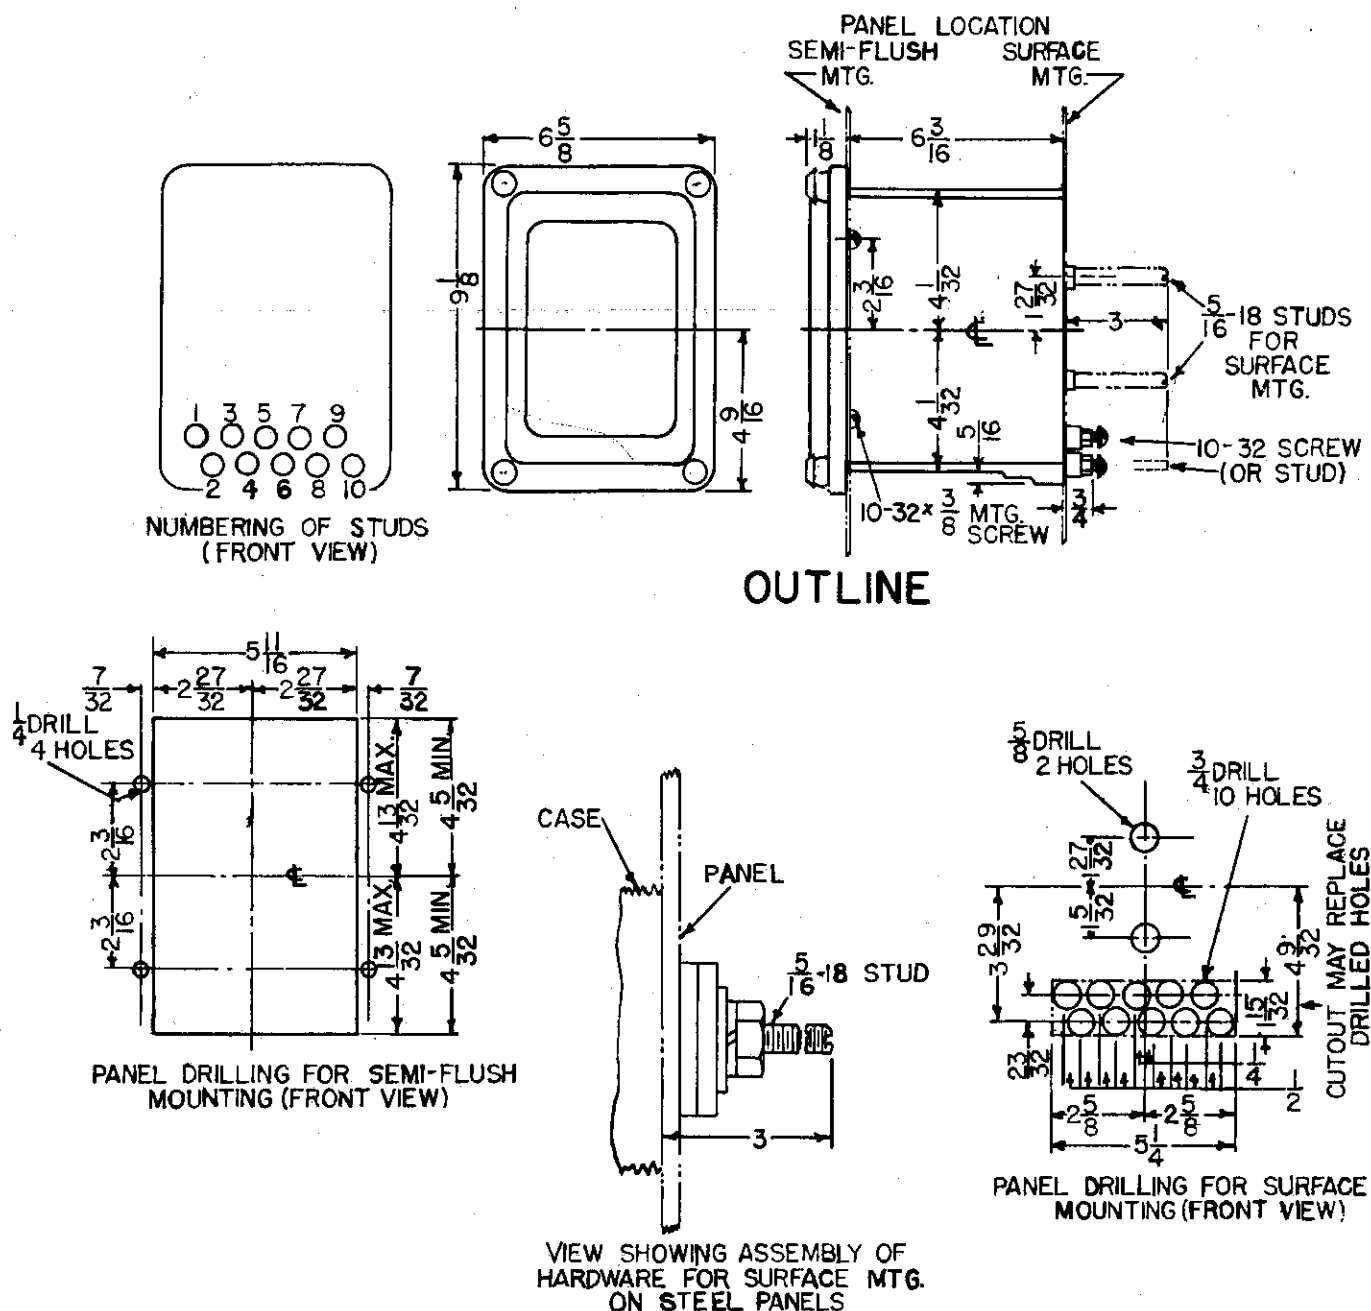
(6209271-3) Outline and Panel Drilling Dimensions for SAM Type Relay
